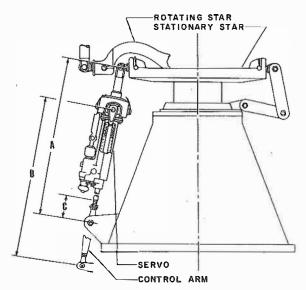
56. Rigging Dimensions — Main Rotor Primary Servo Units
